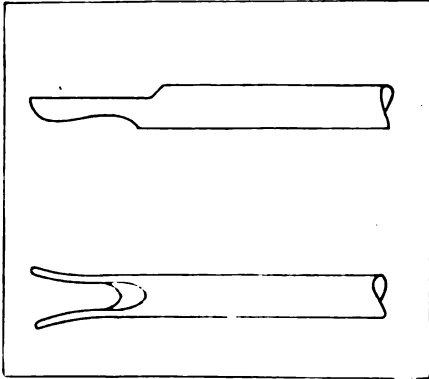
Practical Valve Lifter Can Easily Be Made from Piece of Piping.
